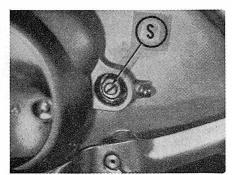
The clutch adjusting screw (S) is located under rubber plug in engine left side cover.
